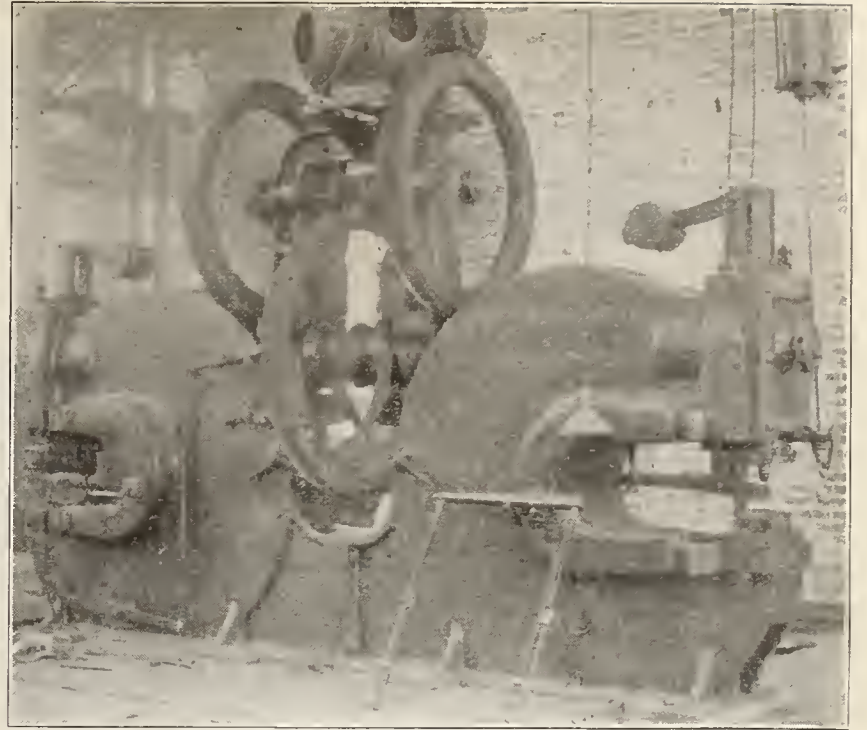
LONG & ALLSTATTER DOUBLE PUNCH AND SHEAR, PERE MARQUETTE SHOPS.
